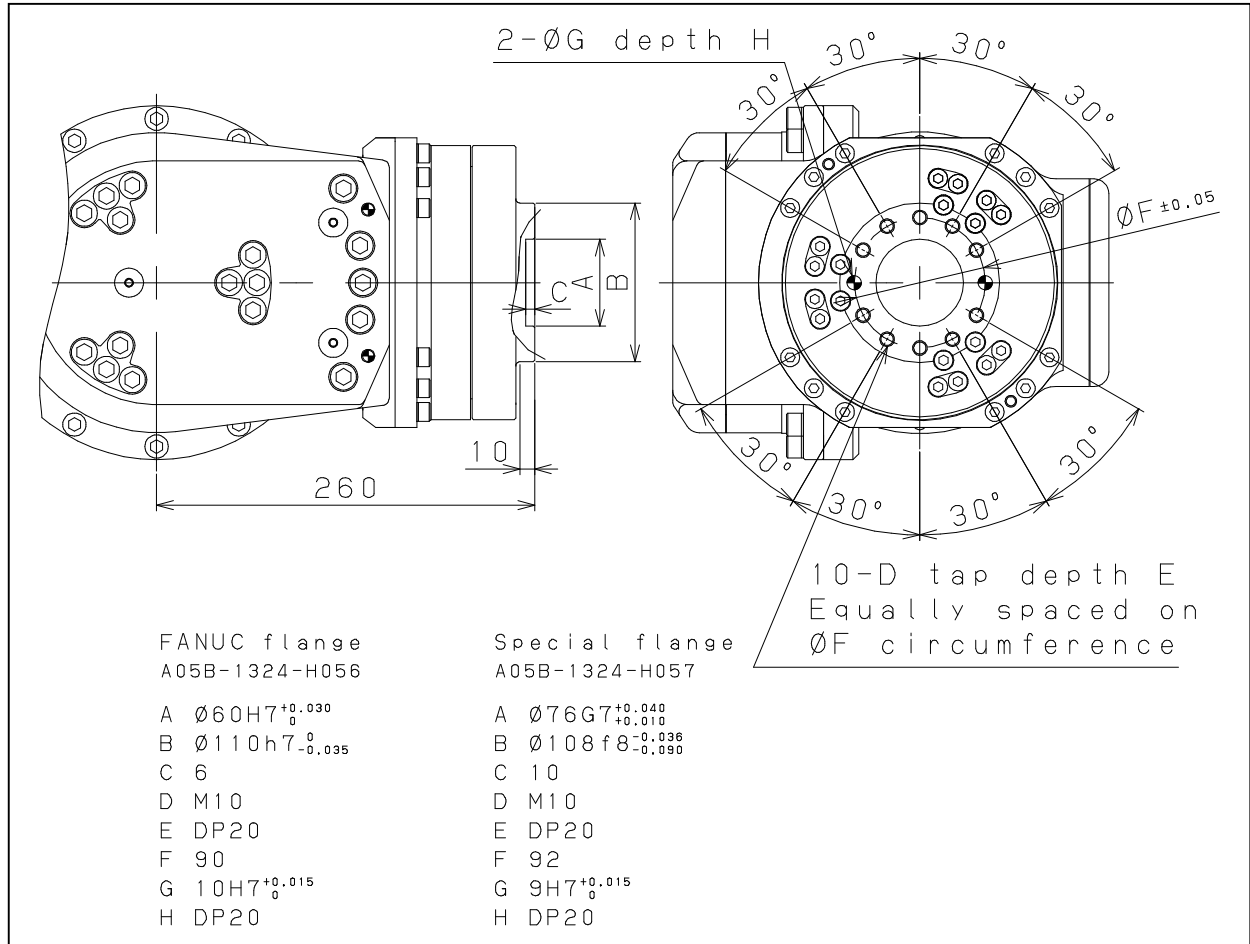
(b) End effector mounting face (FANUC/Special flange)
